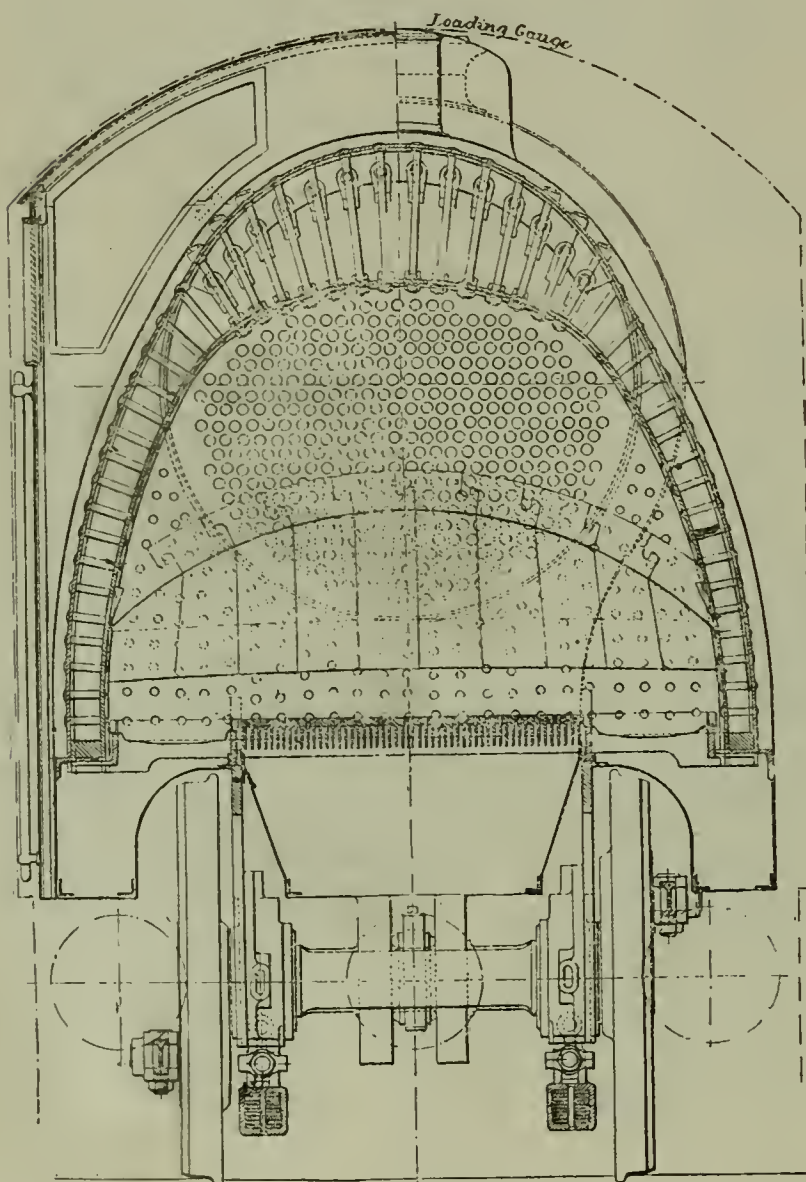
CROSS SECTIONAL VIEW OF HEAVY ENGLISH LOCOMOTIVE.
